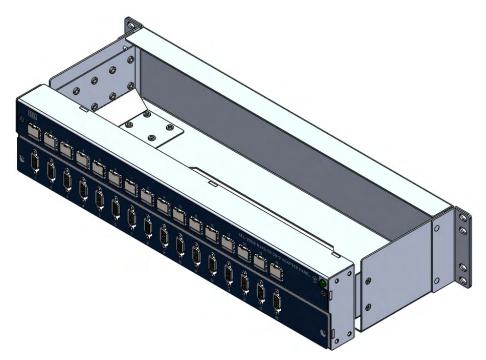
Adjustable Rack Mount Configured to Depth of 8 Inches
